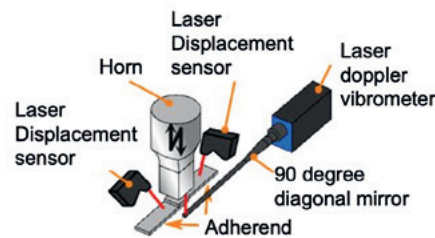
Vibration measurement during ultrasonic welding.
